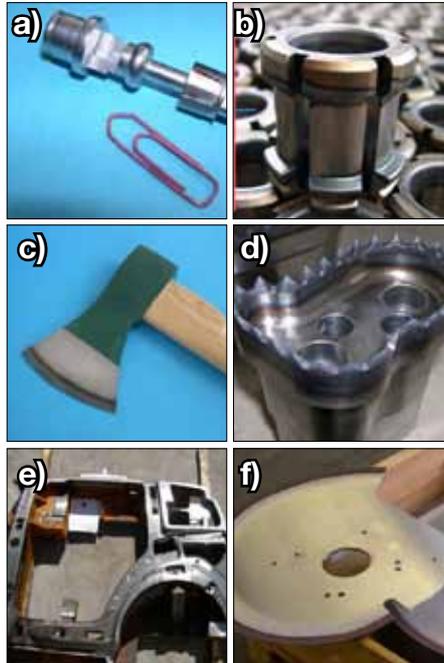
A selection of laser hardened components: (a) lock parts; (b) collet chuck; (c-e) cutting/ stamping tools; (f) rotary knife.
